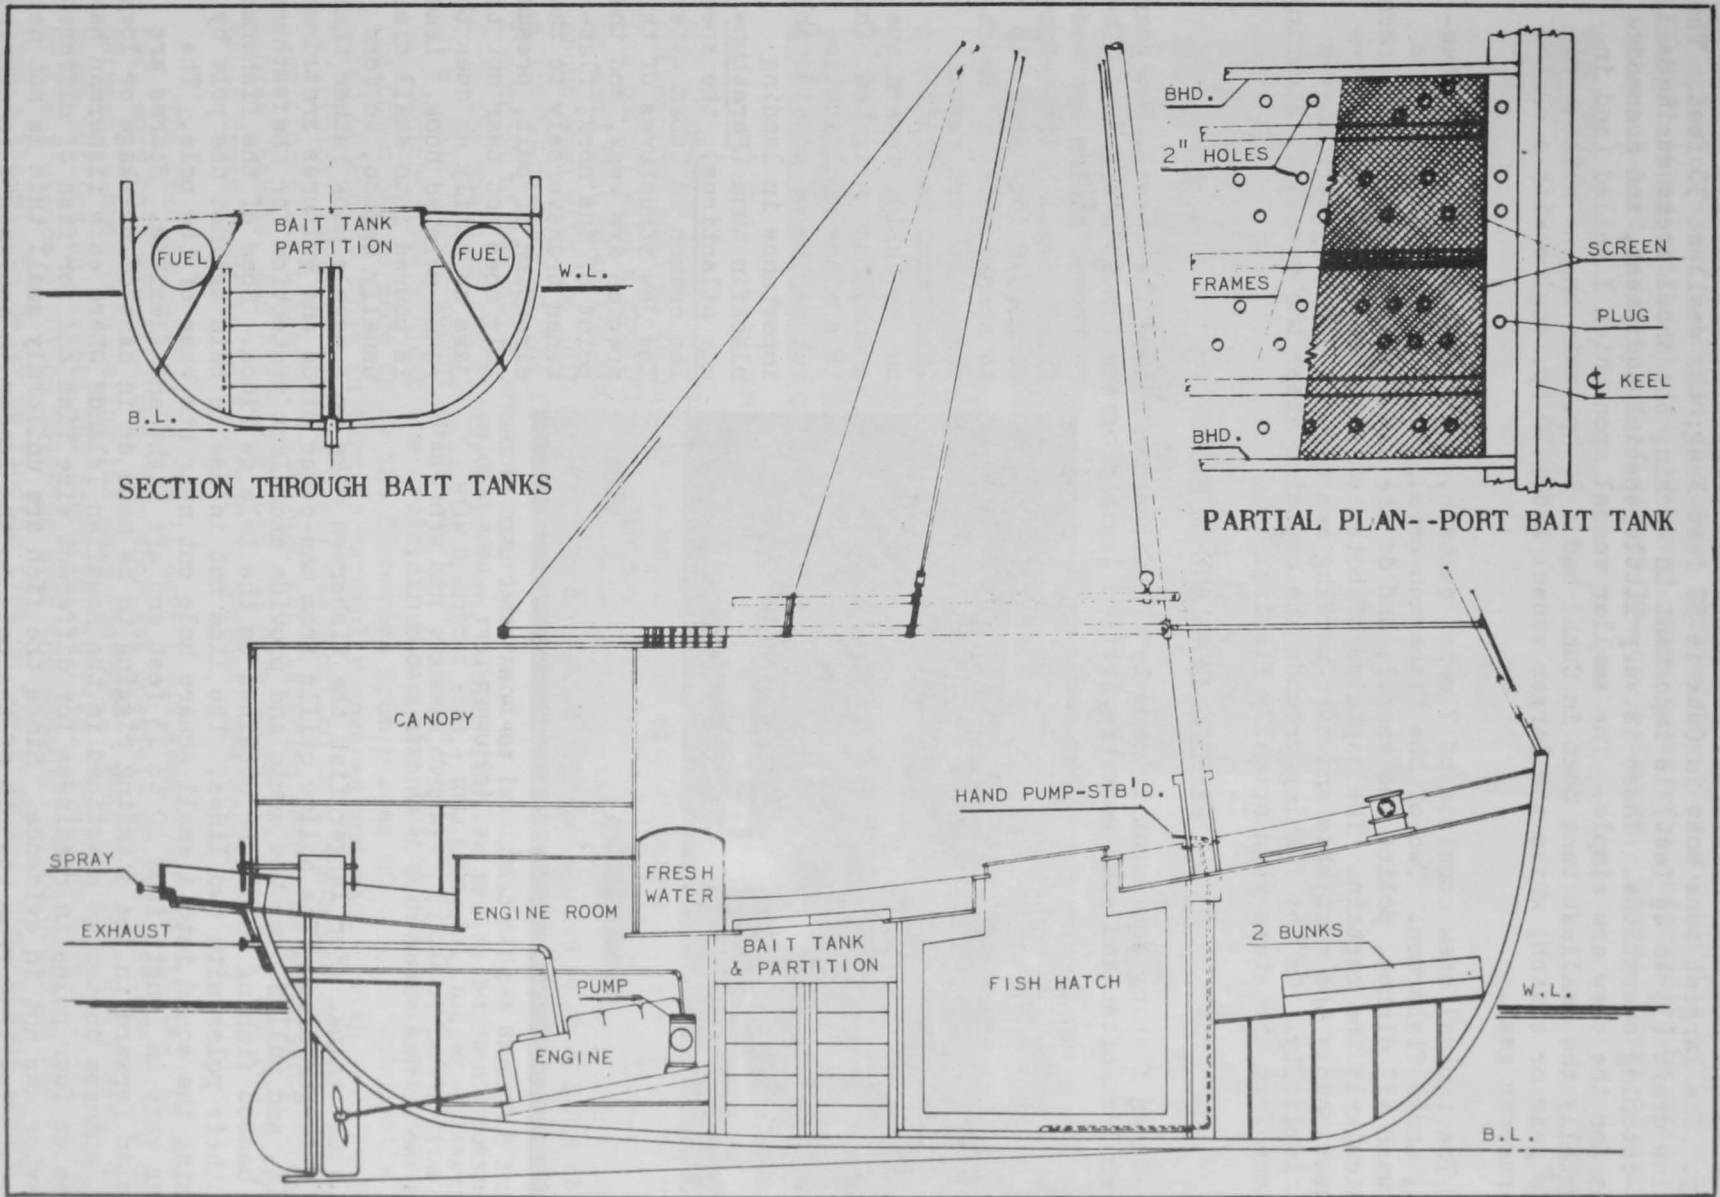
INBOARD PROFILE OF CUBAN TUNA-FISHING BOAT SHOWING TYPICAL ARRANGEMENT.
